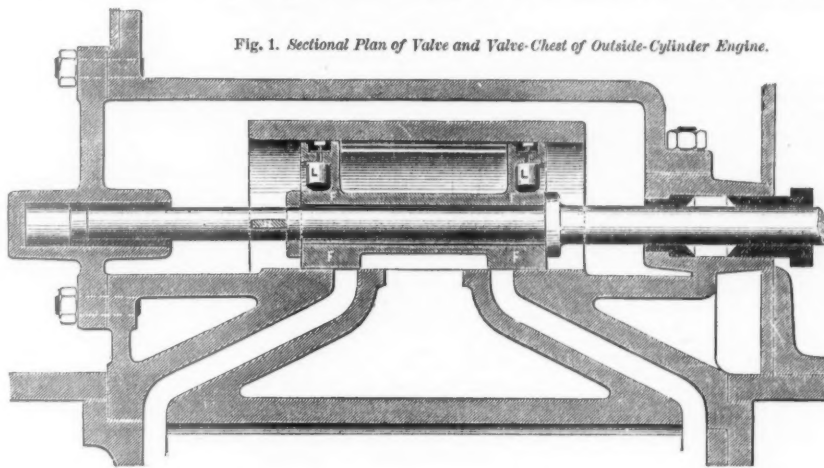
Sectional Plan of Valve and Valve-Chest of Outside-Cylinder Engine.
